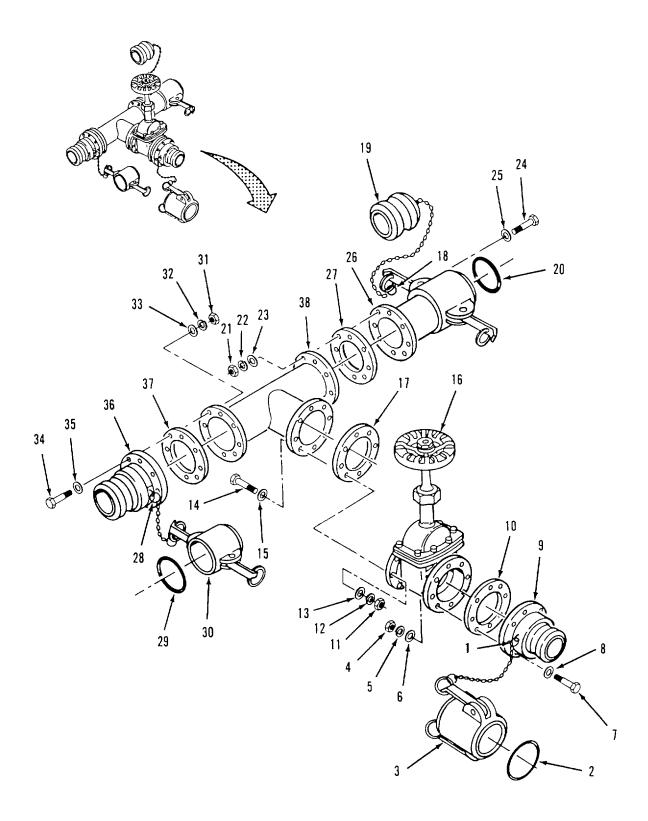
Tee and Gate Valve Assembly (9114-Y1) Assembly.
